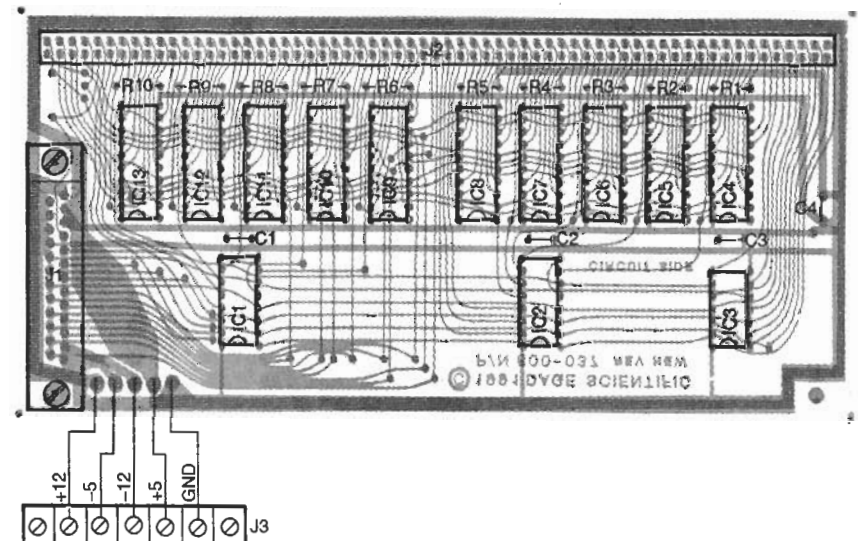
BREADBOARD CARD parts-placement diagram. All 126 of the pins in J2 mount on the solder side of the board.
